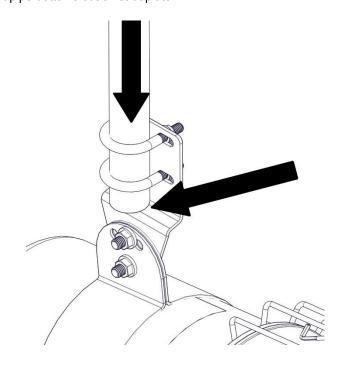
Secure mount can strap with (1) $3/8 \times 1.00$ " serrated flange bolt and (1) 3/8" serrated nut. 9/16" wrenches required.
